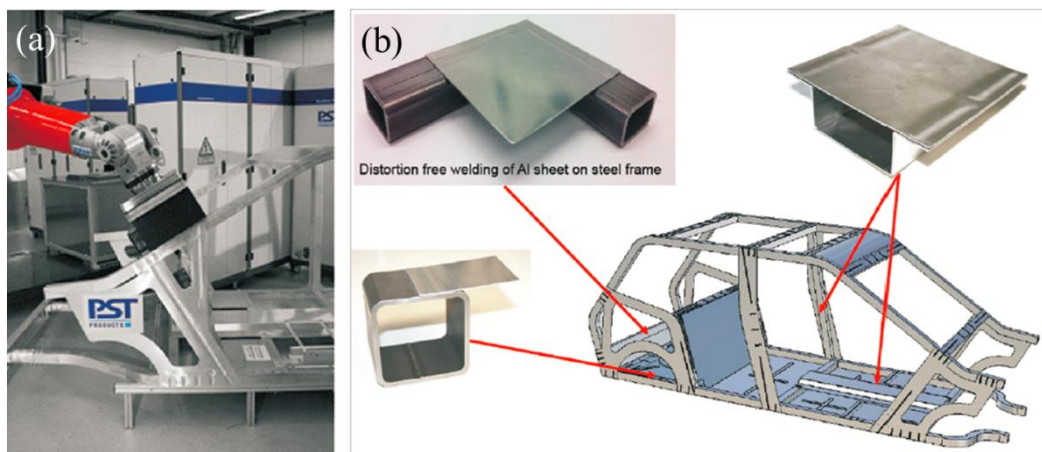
(a) Automated robotic arm used to implement MPW during a Body in White (BIW) construction and (b) various components welded by MPW with the robotic arm developed by “PST products” company [43].
